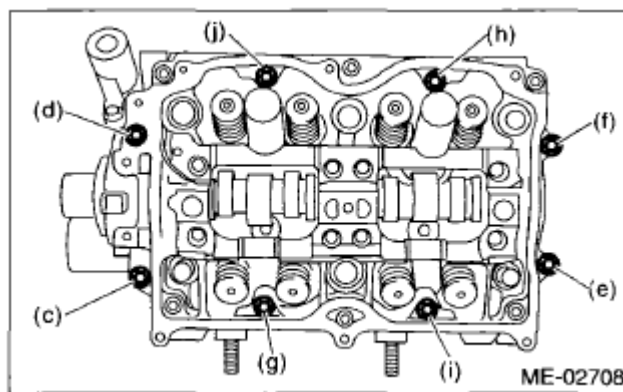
Identifying Camshaft Bolts Loosening Sequence
